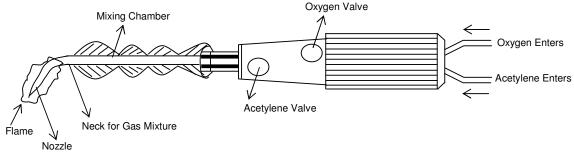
Blow Pipe Used in Gas Welding
